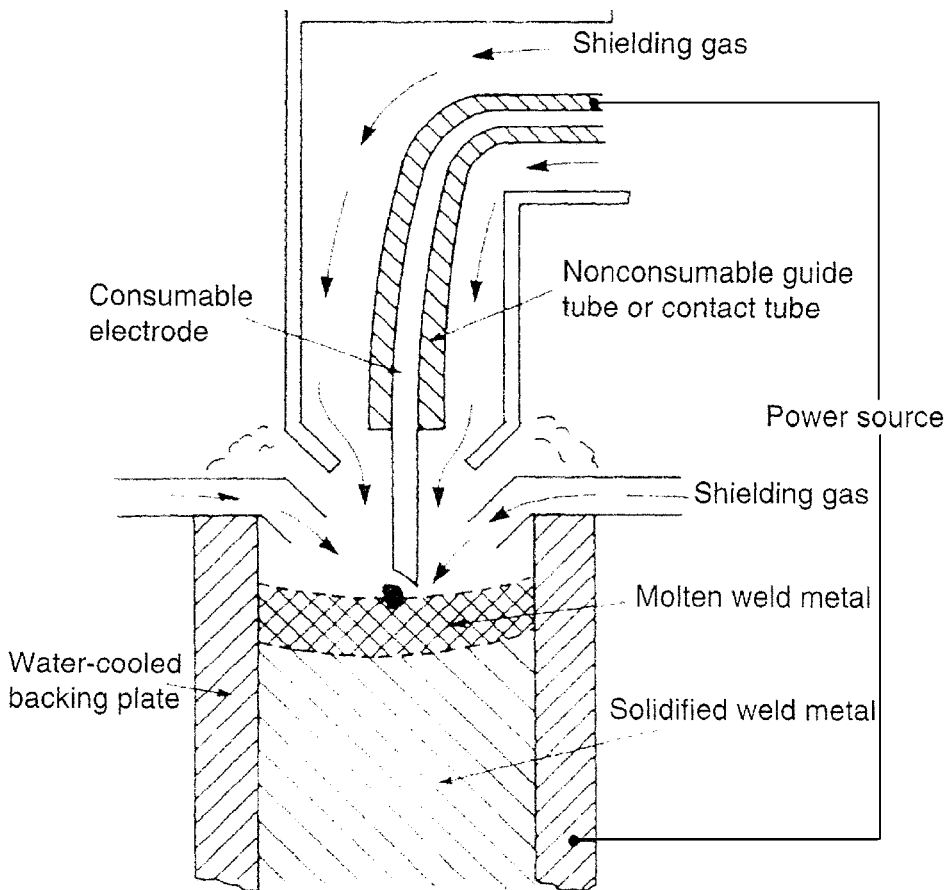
Schematic illustration of the electrogas welding process used for heavy deposition welding in position or in a vertical plane using special tooling (as shown). Source: Ref 2
